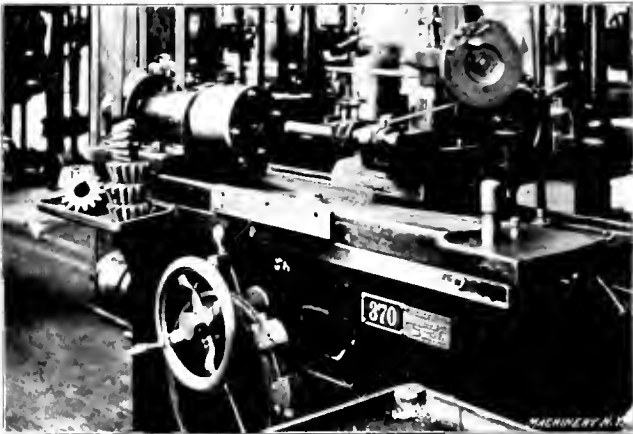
Grinding the Hole in a Hardened Bevel Gear—See Detail of the Chuck in Fig. 28
